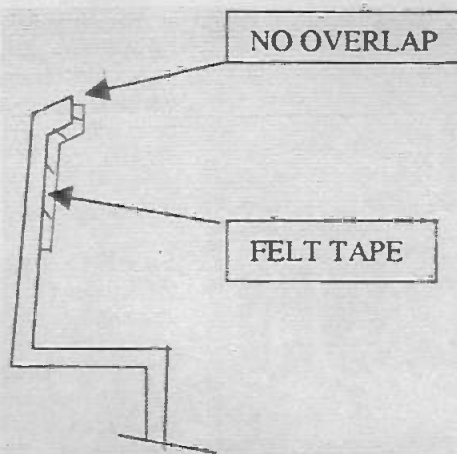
How the tape should be fitted. Section of front cover, lower mask area.
